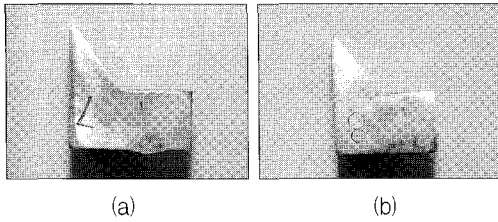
Fusion depths resulted from seal welding with different welding condition
